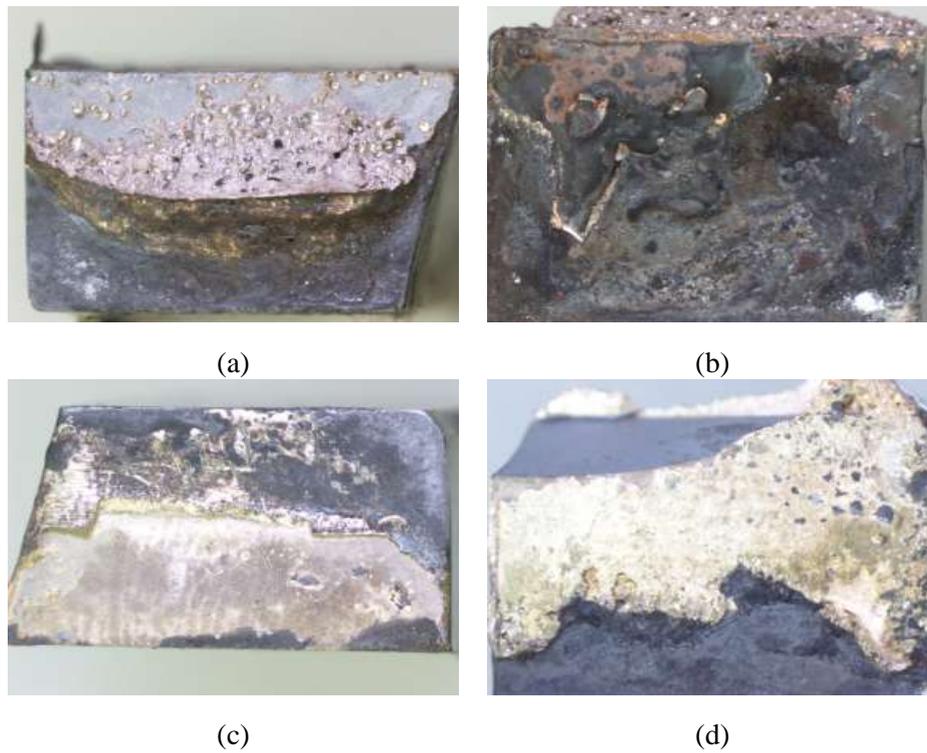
Fracture test specimens, (a) and (b) using copper filler metal, (c) and (d) using silver filler metal.
